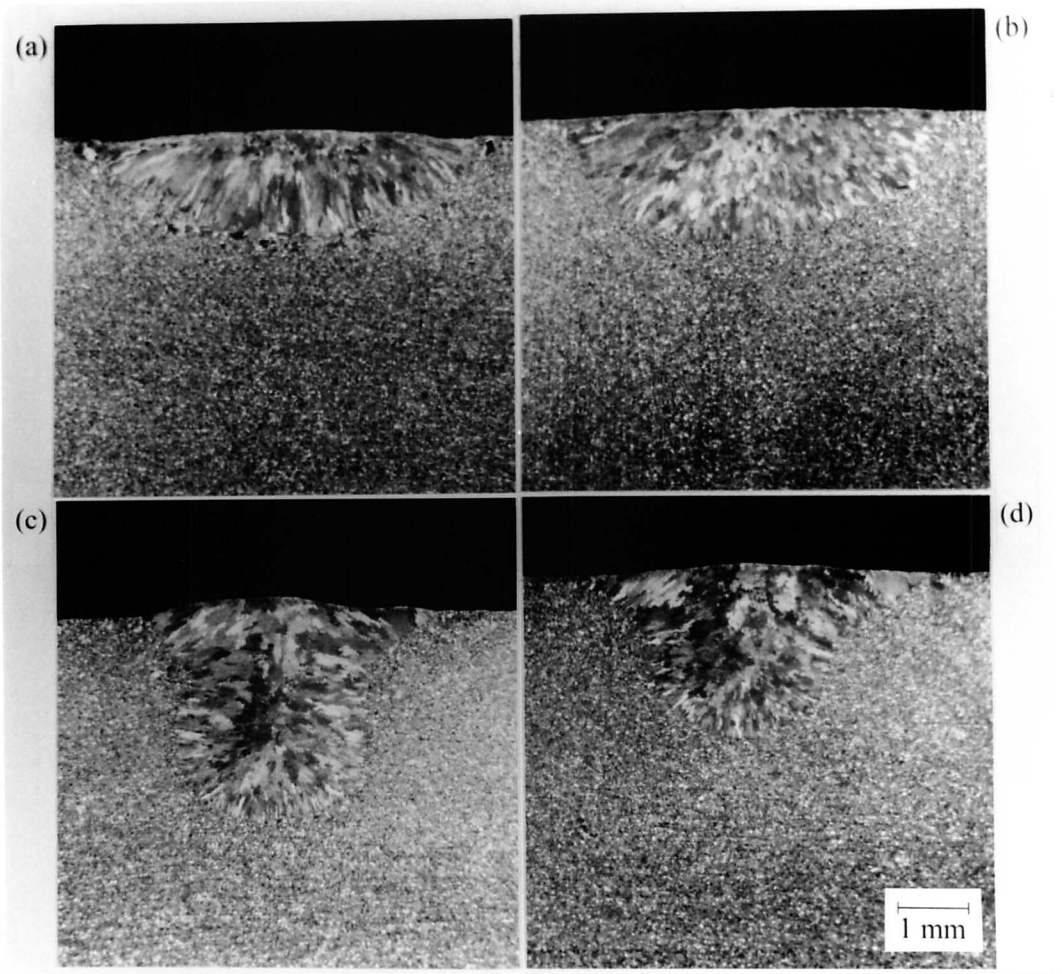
Plan views 100 μm below weld surface of (a-d) S5-S8.
